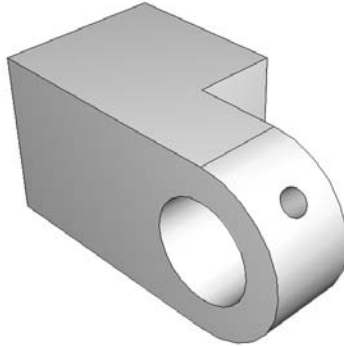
Isometric shaded view of the hinge with the lubrication hole.
